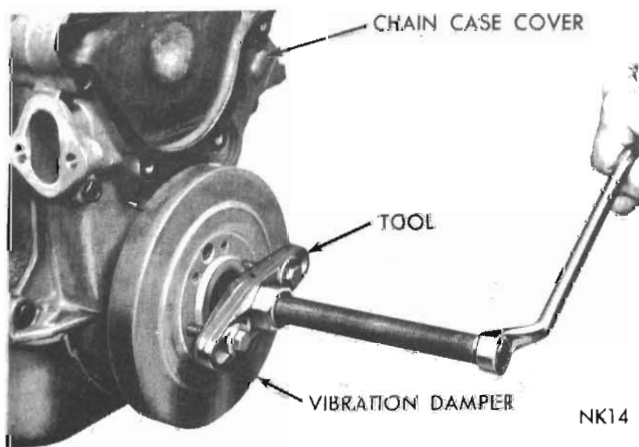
Removing vibration damper assembly (Using Tool E9C55B)
